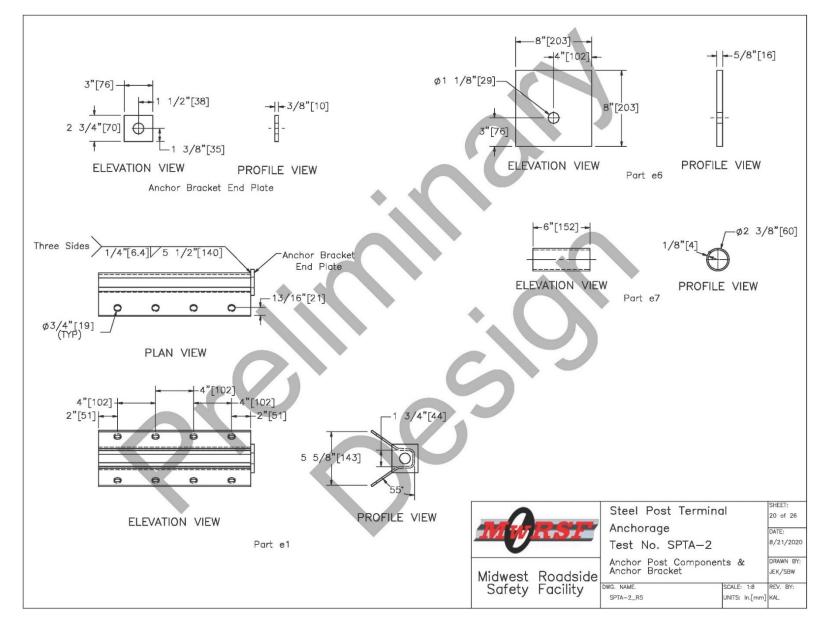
Anchor Post Components and Anchor Bracket, Test No. SPTA-2
